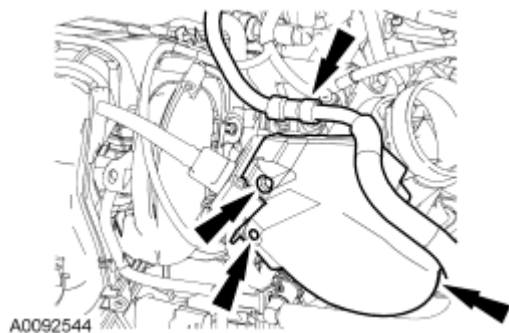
Locating Accelerator Snow Shield, Screw And Pin-Type Retainers
